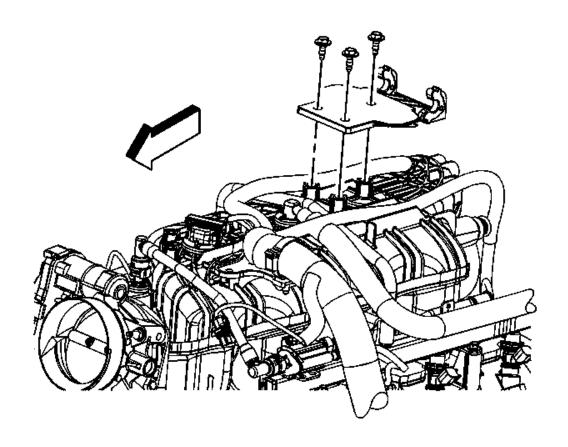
View Of Intake Manifold Sight Shield Retainer & Bolts Courtesy of GENERAL MOTORS CORP.
